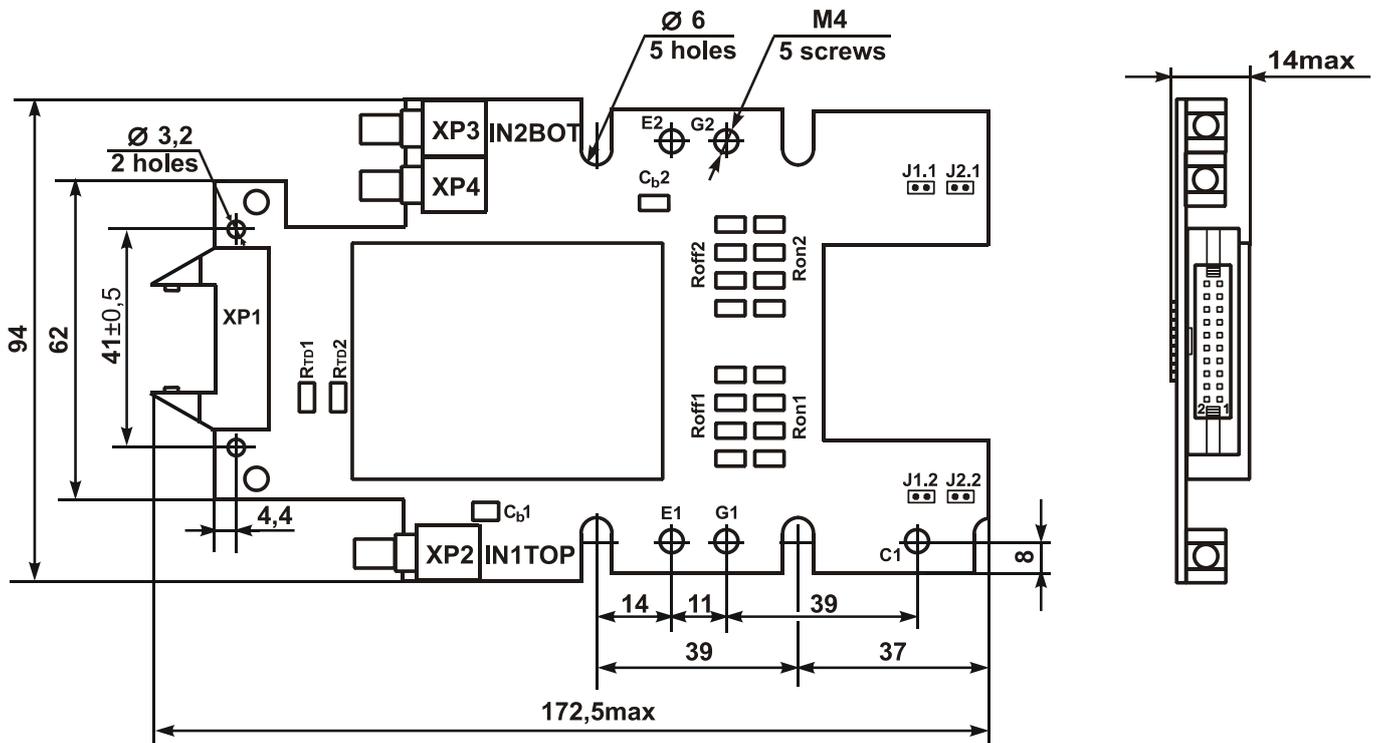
Overall drawing of driver DR2180P-BF1-2
